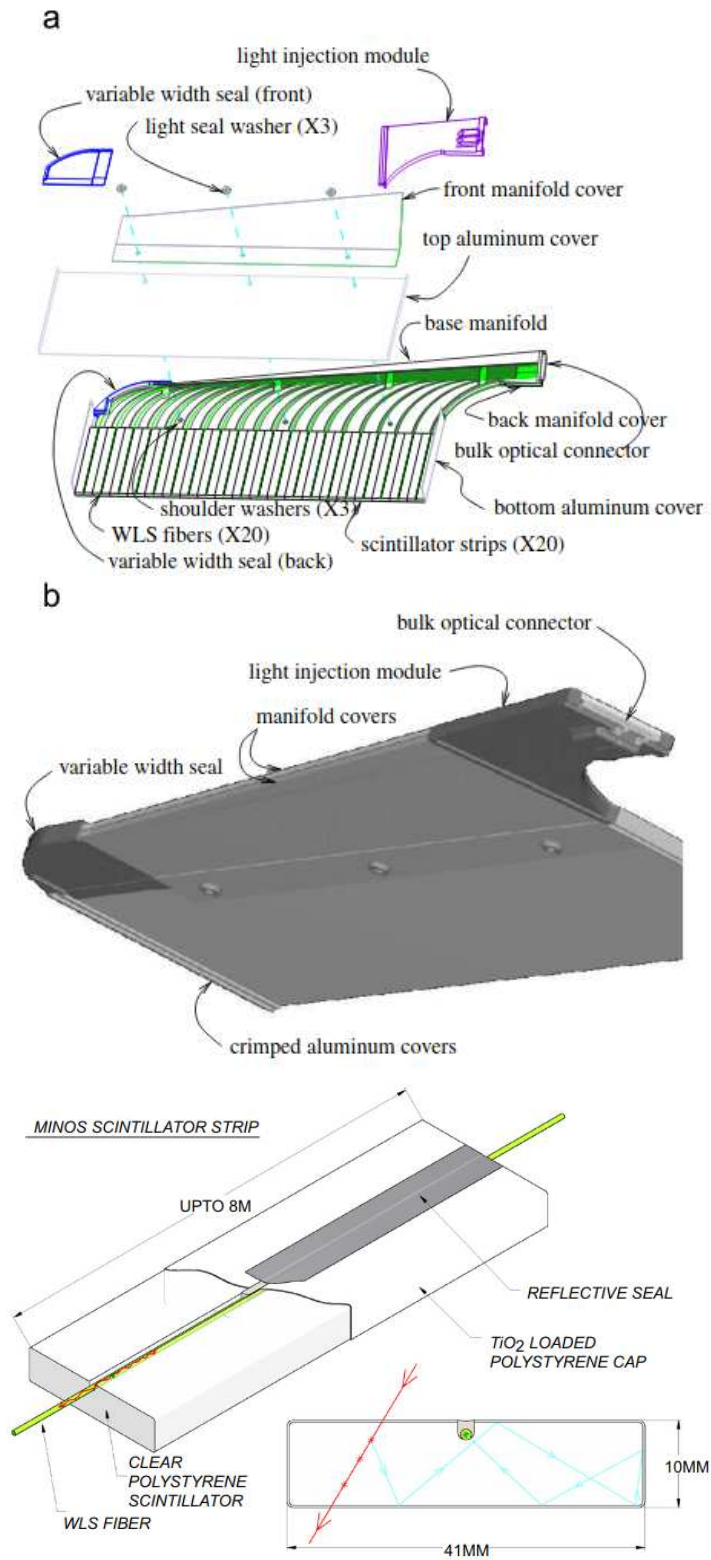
The composition of a MINOS scintillator module is shown on top with a detailed view of the scintillator strip design on bottom [61].
